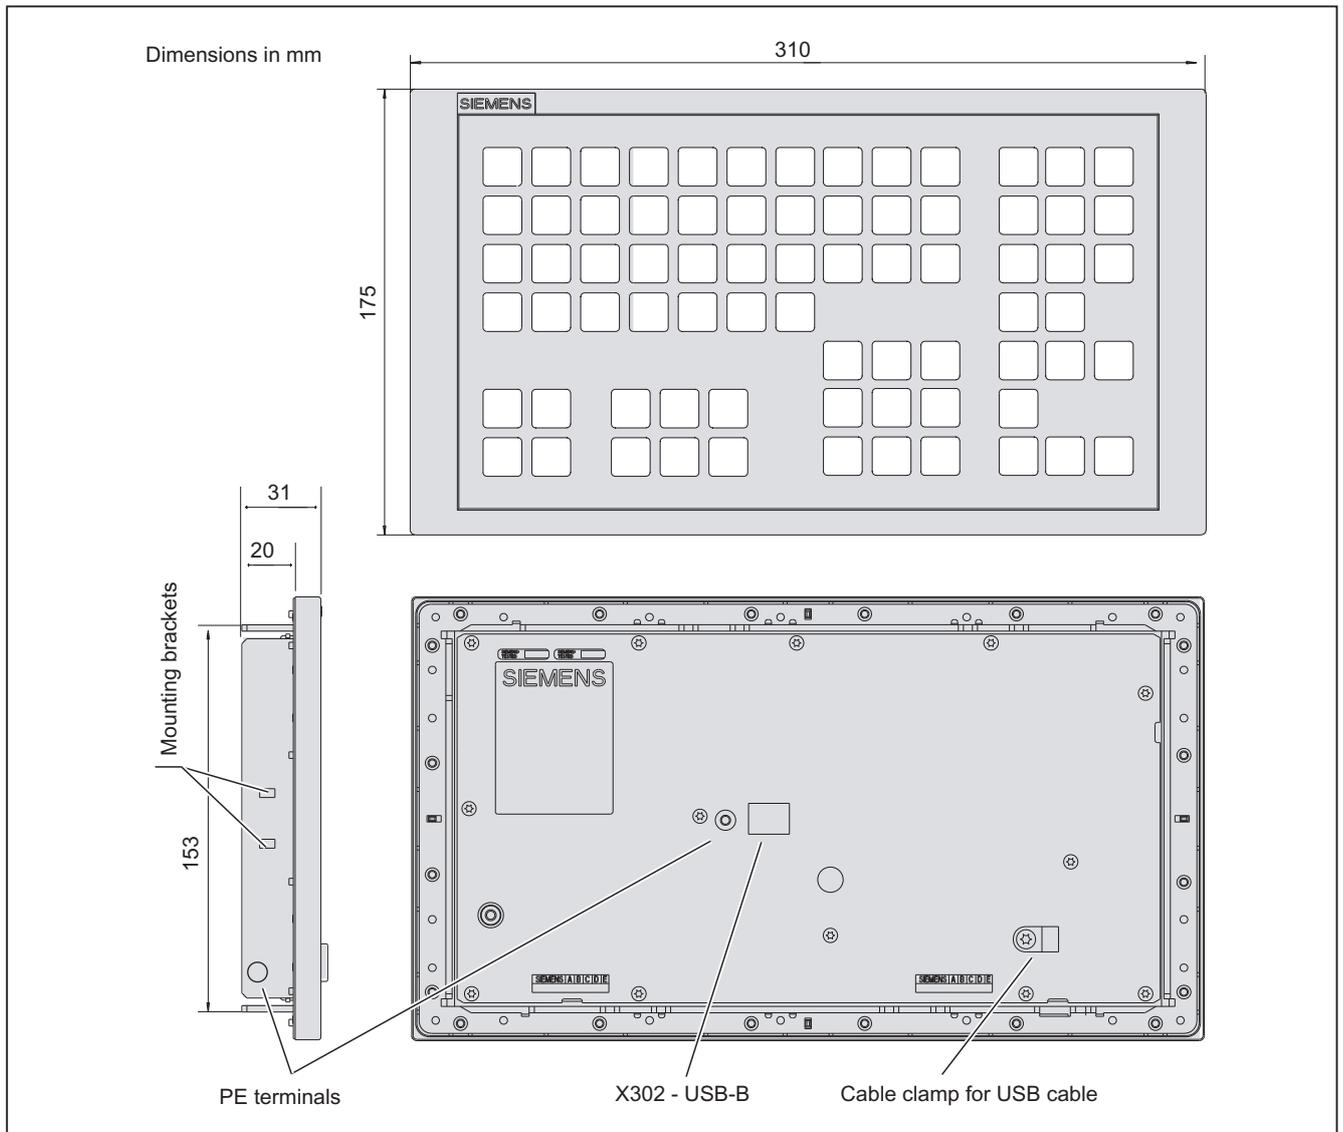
Front, side and rear views of CNC full keyboard KB 310C
